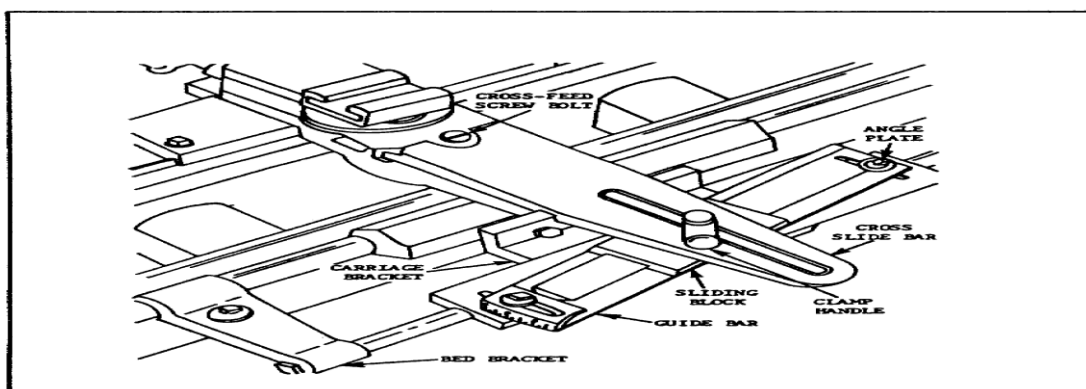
0:18 lathe fitted with telescopic taper attachment.
